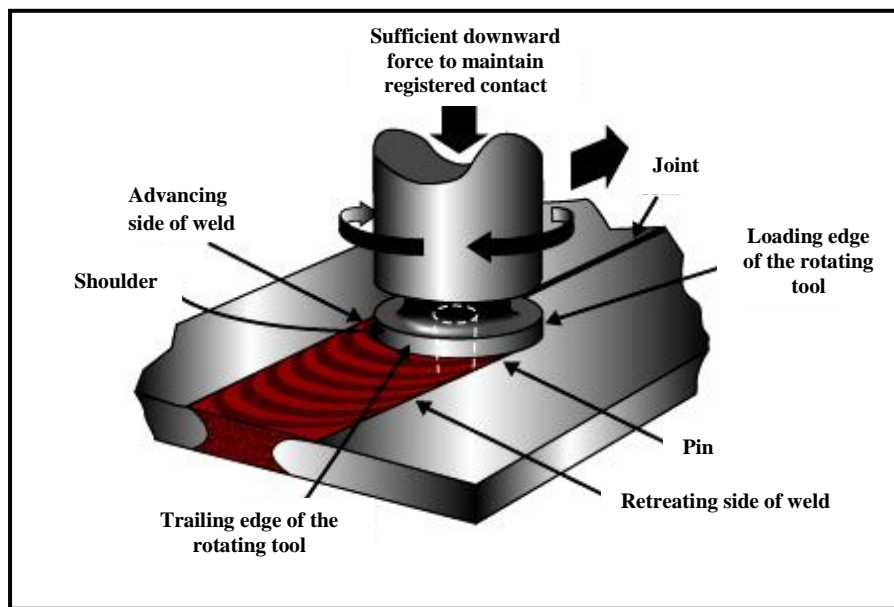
Friction stir welding process (Liechty, 2007)
